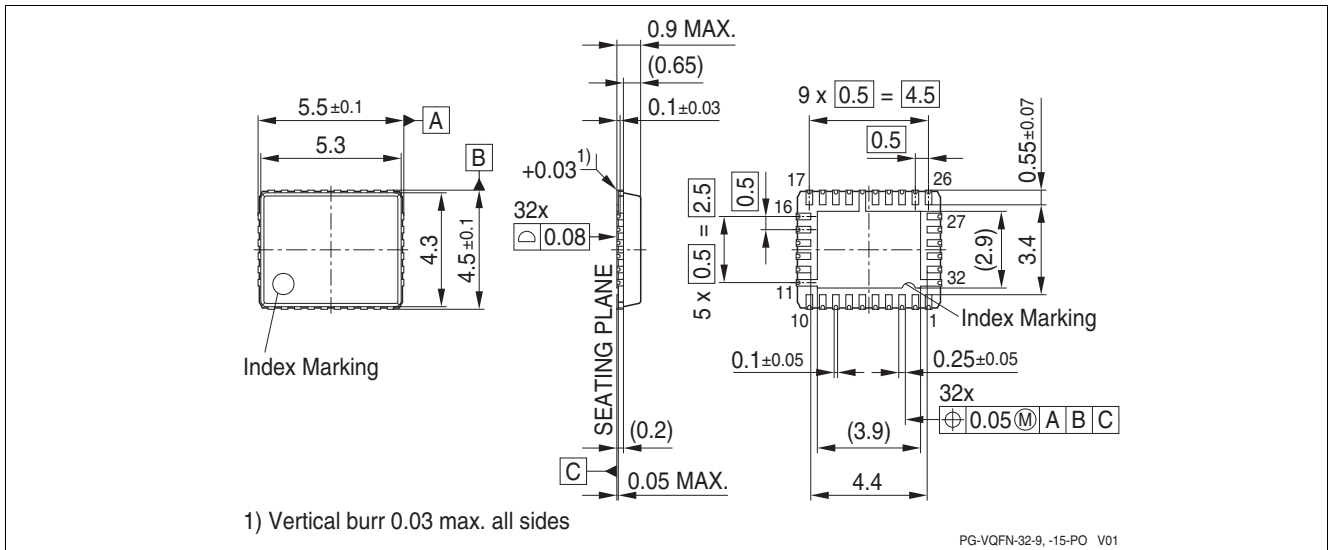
Package Outline (Top, Side and Bottom View) of VQFN32-9
